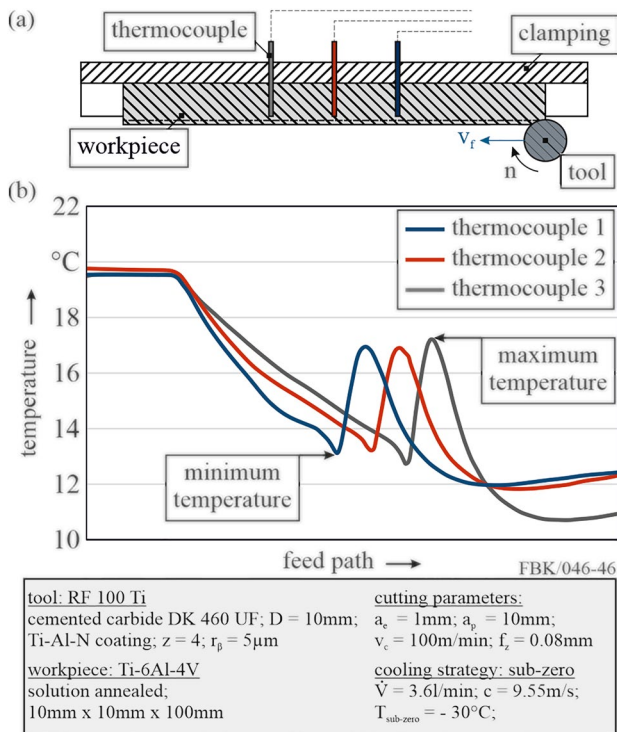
Schematic view of the positioning of the thermocouples (a) and representative temperature profile measured inside the workpiece surface layer (b)
